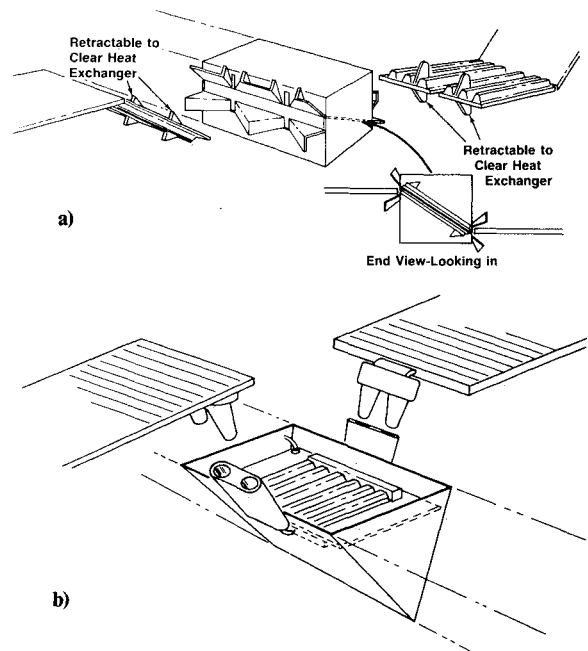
Dogleg assembly techniques: a) mechanical interface version; b) quick disconnect version.
